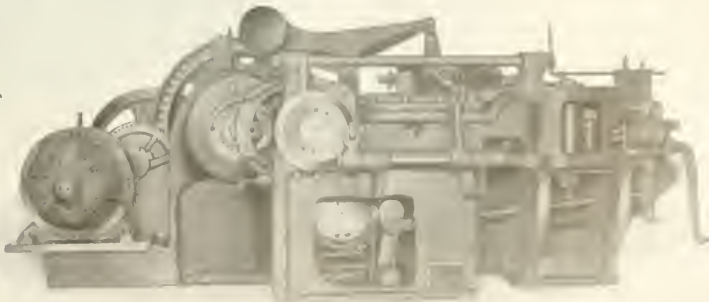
Left-hand Side of Machine, showing Mechanism for operating Feed Rolls and Stop
